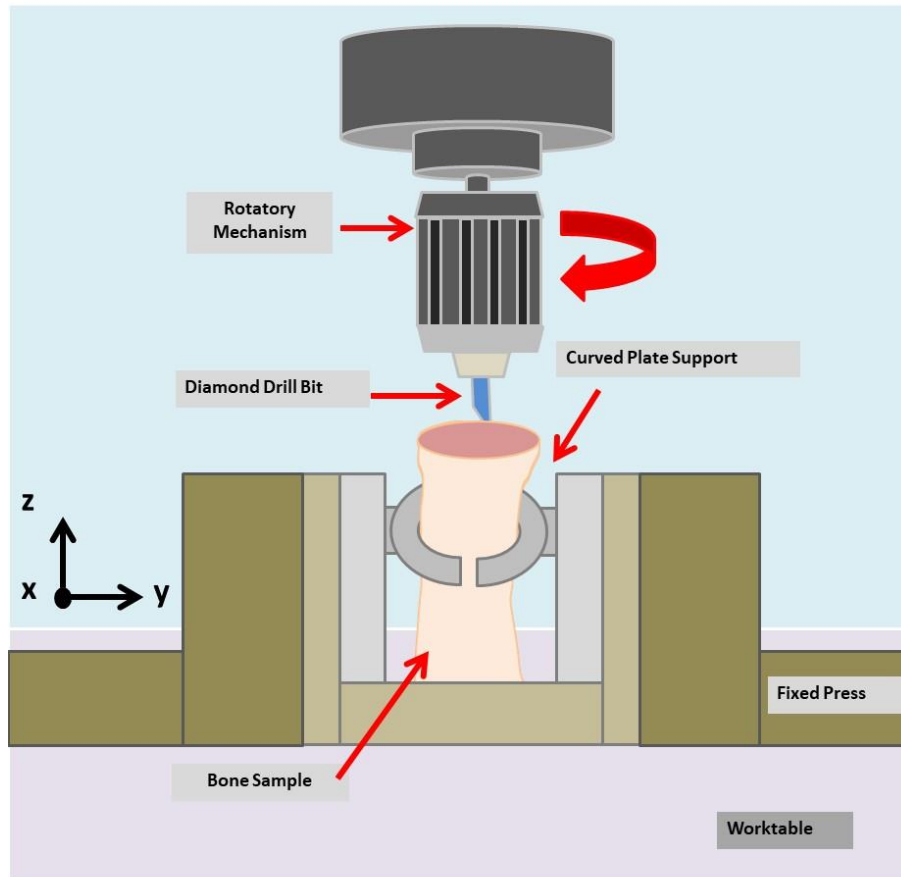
Bone extreme face machined over the xy plane. The horizontal support of the first grinded extreme of the bone guarantees parallelism between final diaphysis' extremes for the test.
